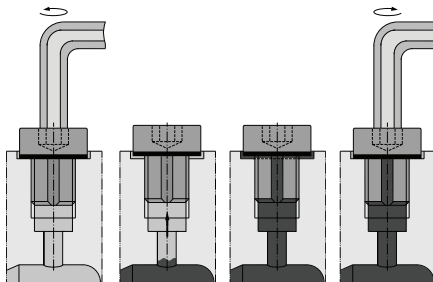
Filling and bleeding hydraulic cylinders with internal hexagon bleed screw
